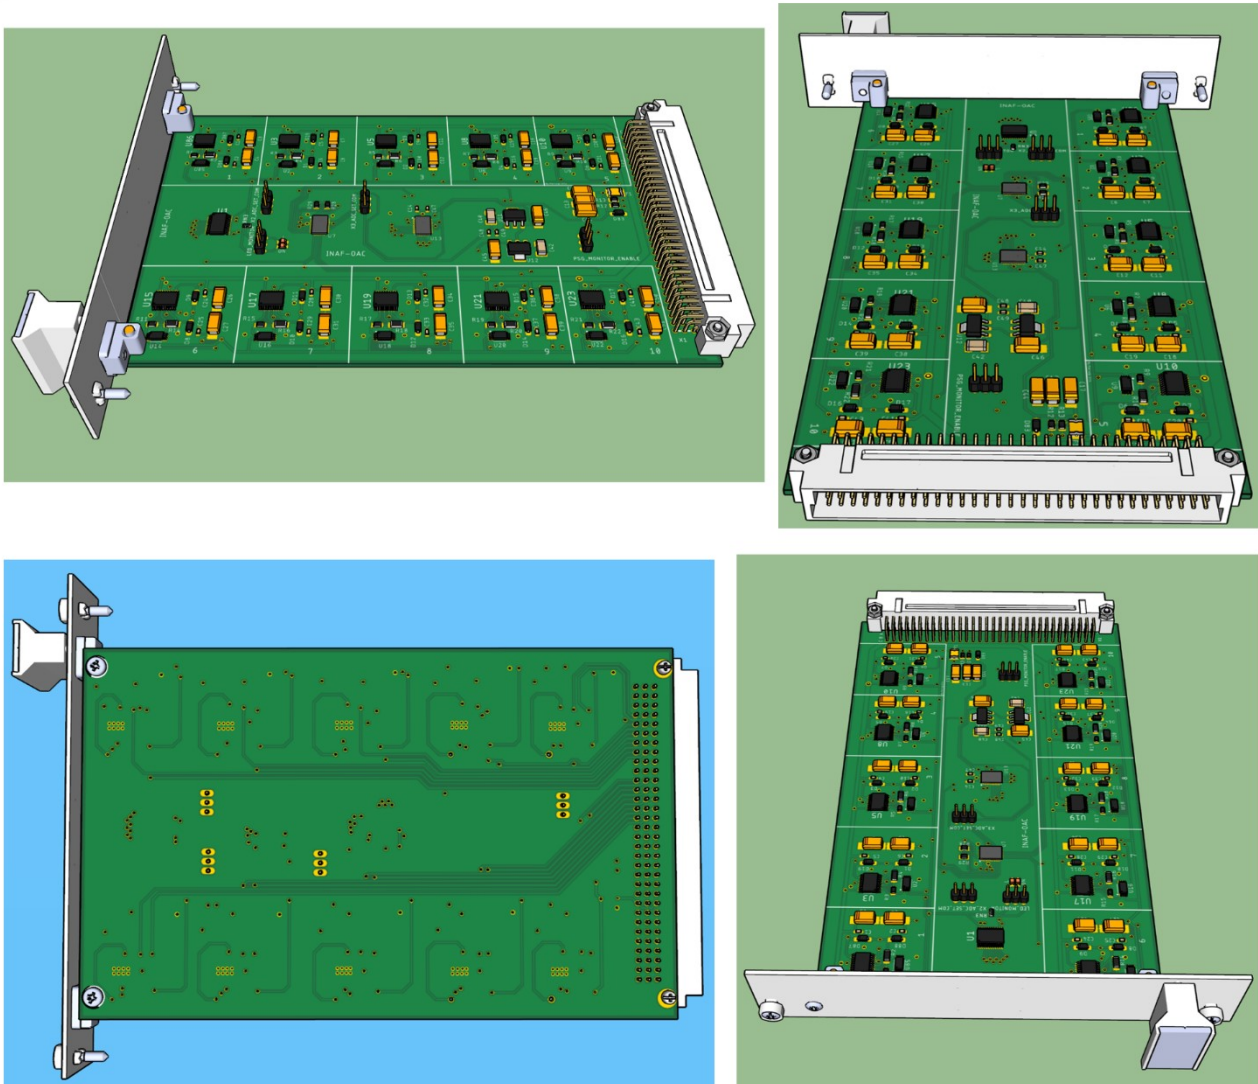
3D drawings of the PSG board version 1.0 designed by INAF.
